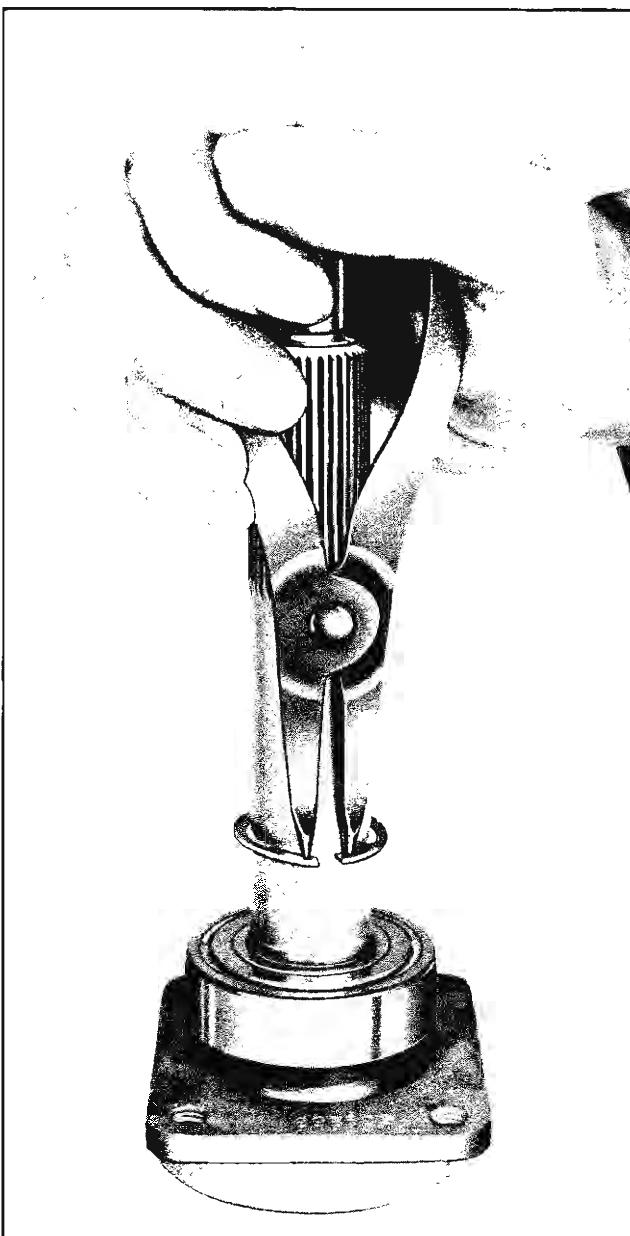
D-13 Removing Drive Shaft Bearing Retainer
